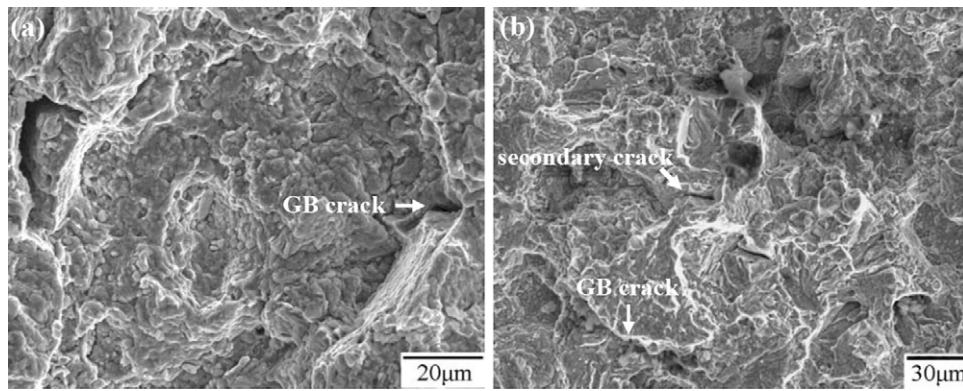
Fracture surfaces of tensile test: (a) Mar-M247 and (b) C(5Re).
